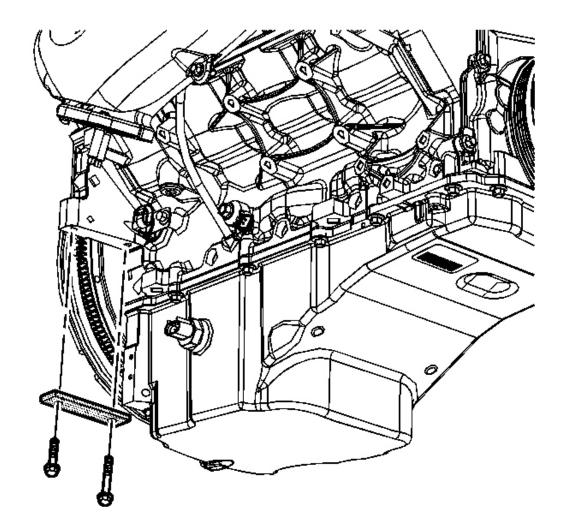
Identifying J 42386-A Flywheel Holding Tool Courtesy of GENERAL MOTORS CORP.
